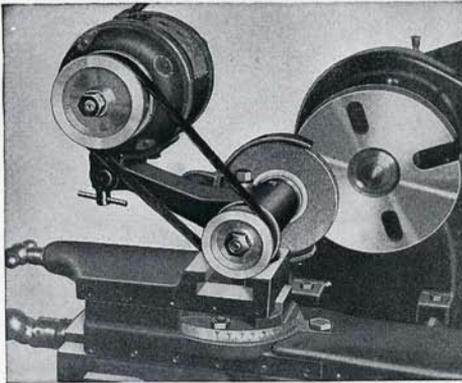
Electric Grinder Attachment for Lathe. Cat. No. 15-1. Price.....\$75.00
